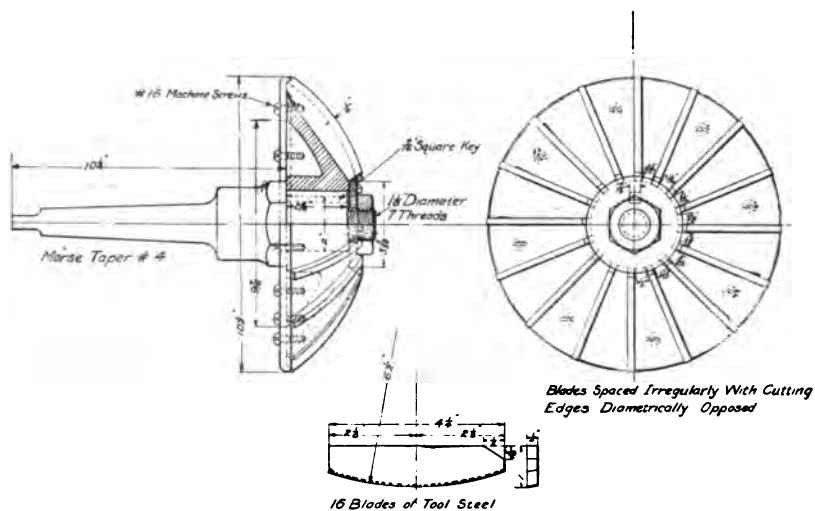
ELEVATION AND SECTION OF BALL-JOINT REAMER, SHOWING THE DETAIL OF CONSTRUCTION. THIS REAMER FINISHES ALL STEAM AND DRY-PIPE JOINTS TO STANDARD RADIUS WITHOUT CHATTERING, WHICH THE USUAL REAMER WILL NOT DO.
